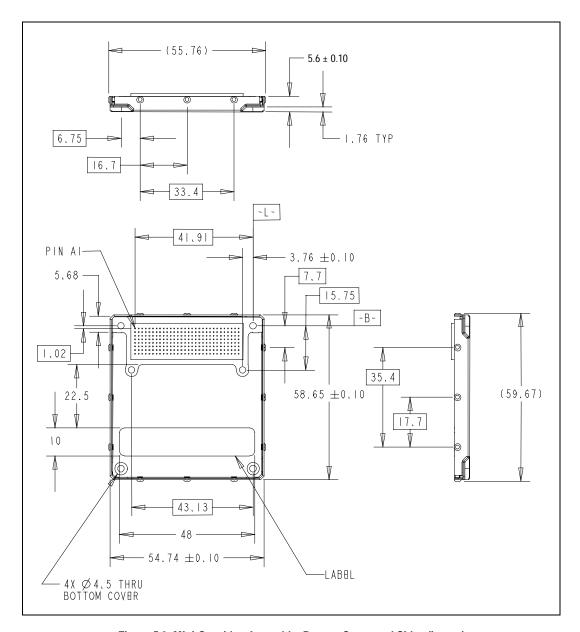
Mini-Cartridge Assembly, Bottom Cover and Sides (in mm)
